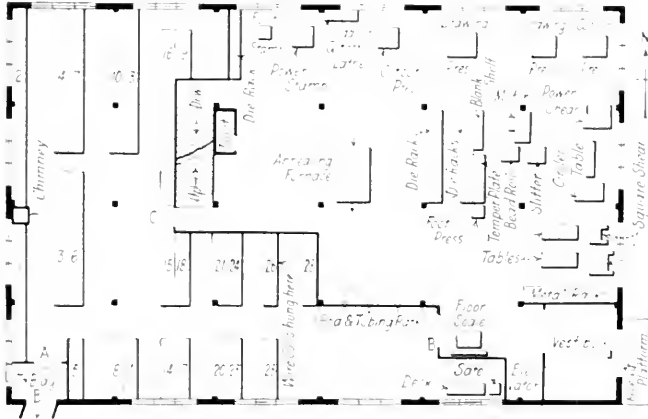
A NEW ARRANGEMENT OF THE STORES DEPARTMENT
